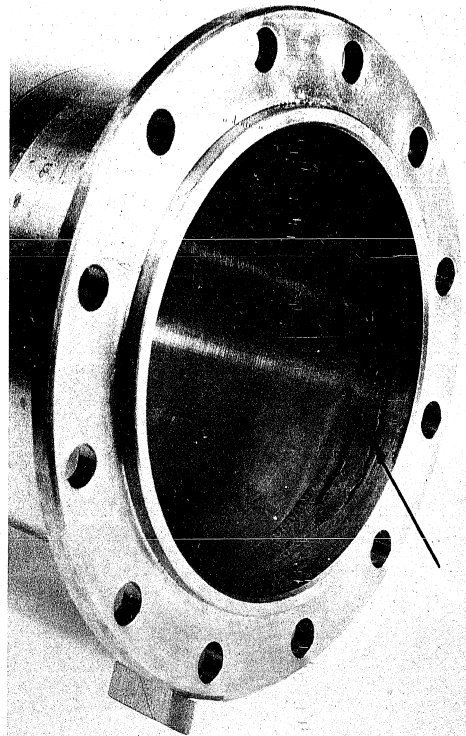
CLOSE-UP PHOTOGRAPH OF THE WELD REPAIR ZONE OF THE TURBINE ROTOR SHAFT.
